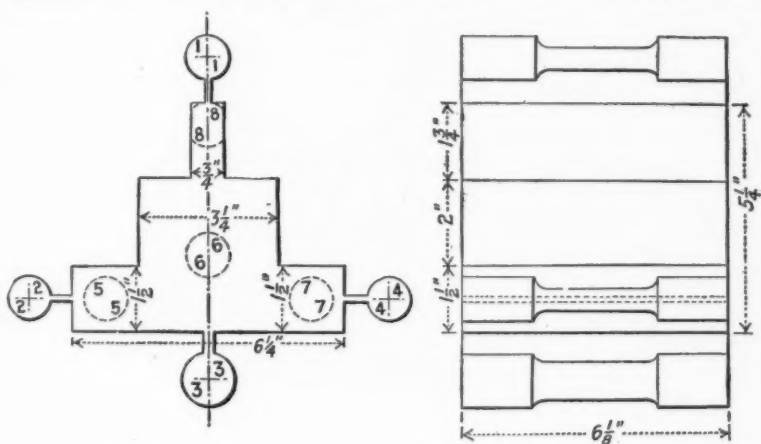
Test Block showing Dimensions and Numbering of Test Specimens.
